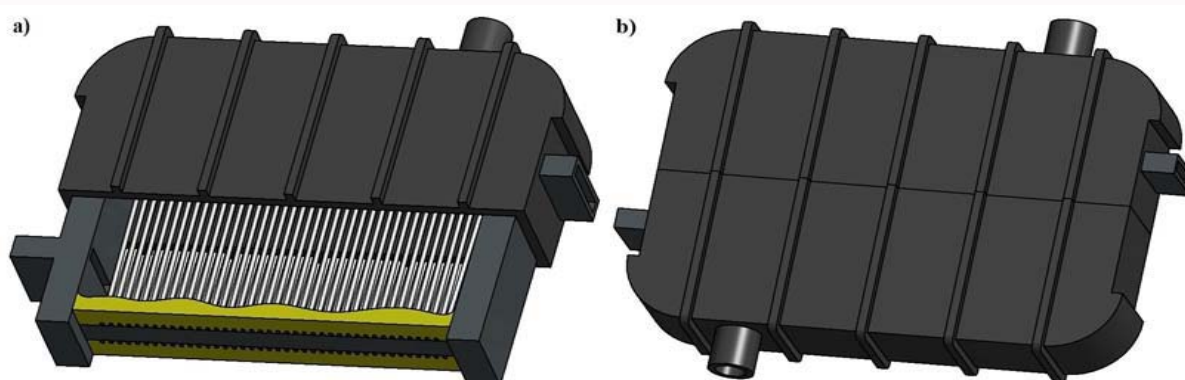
Shell assembling process for cuboid-shape shell-and-tube PHFHE: a) Top cover assembled to make top plenum for inlet or outlet for fiber-side flow; b) Bottom cover assembled to make full shell and bottom plenum.
